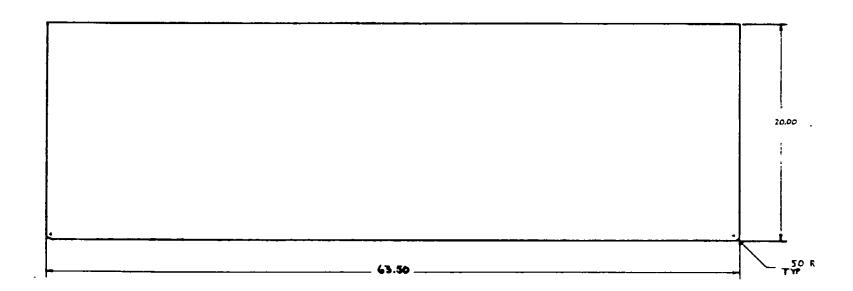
Tool Box Rack (15 Unit) Part No. 200832673 (Sheet 2 of 10)
